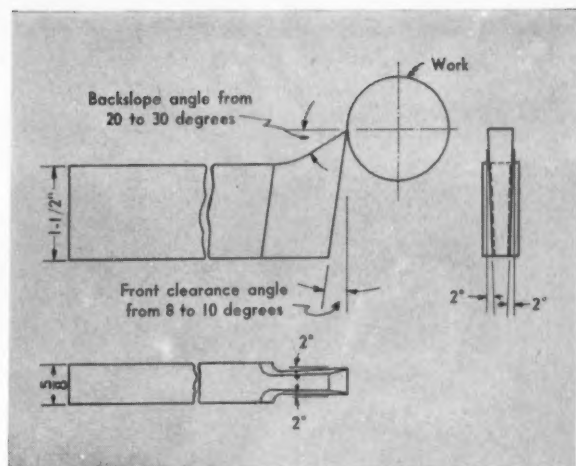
Drawing showing standard 15-degree toolholder with bit properly ground for lathe work on magnetic ingot iron.
